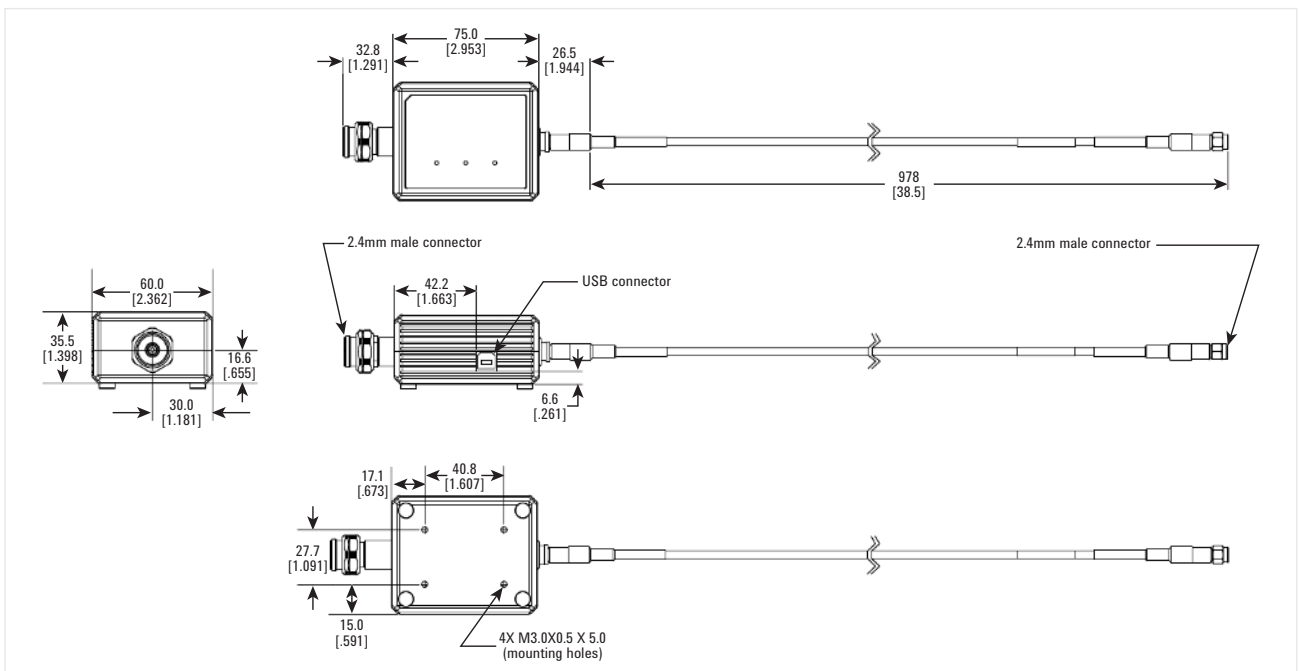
Mechanical dimensions for U7227F USB preamplifier
